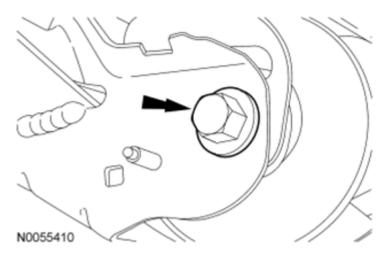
Locating Roll Restrictor Heat Shield Nuts Courtesy of FORD MOTOR CO.
